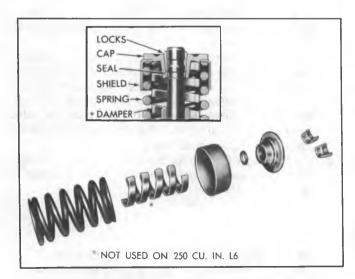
Valve Spring Installation (In-Line and "Small V8")
